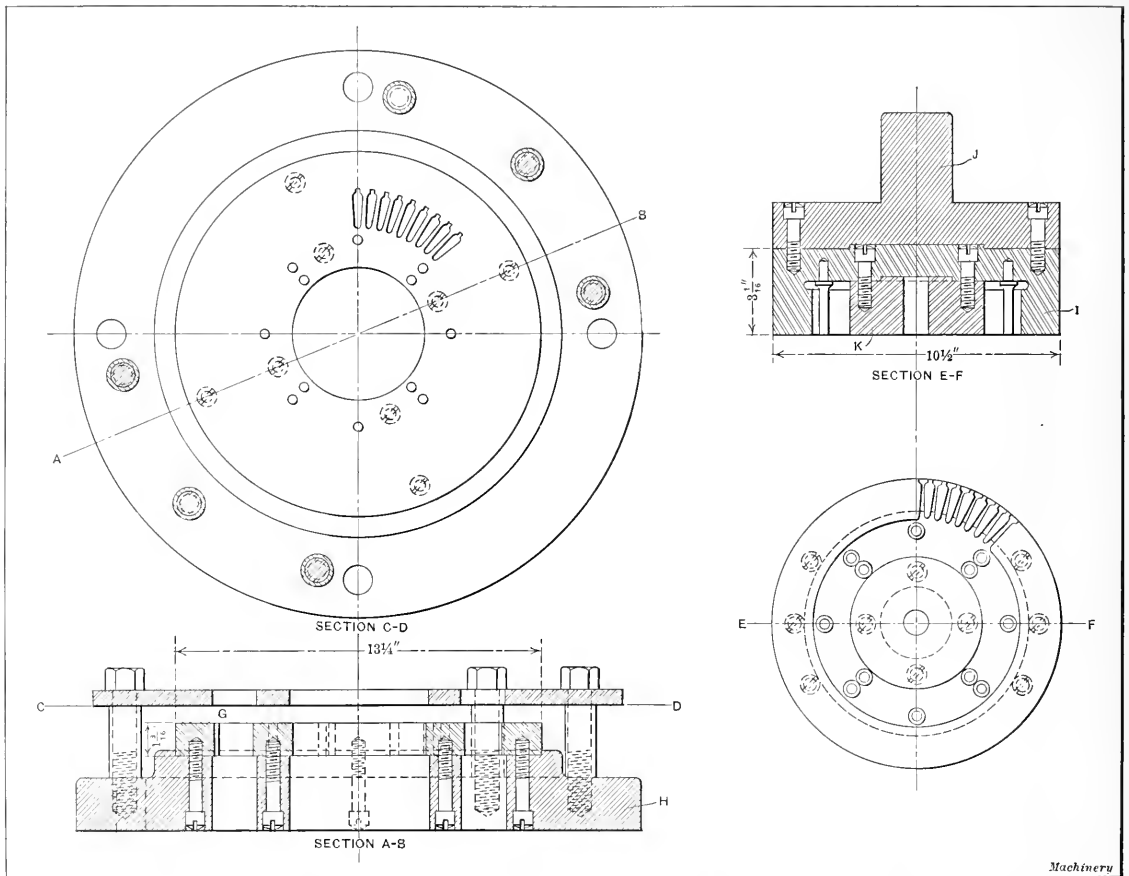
Construction of Solid Armature Disk Punch and Die, which blanks a Disk 10½ Inches in Diameter. Also shown in Fig. 11
